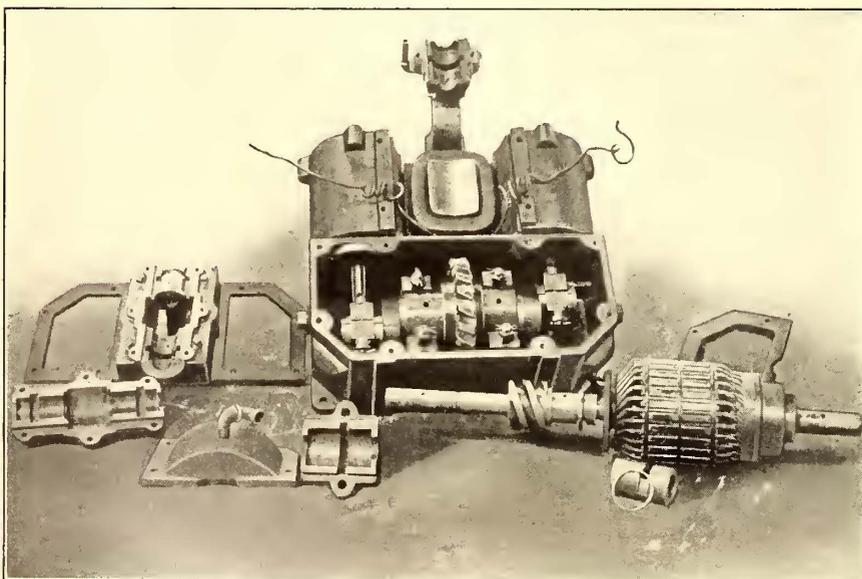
TOP FIELD AND ARMATURE OF MOTOR REMOVED
